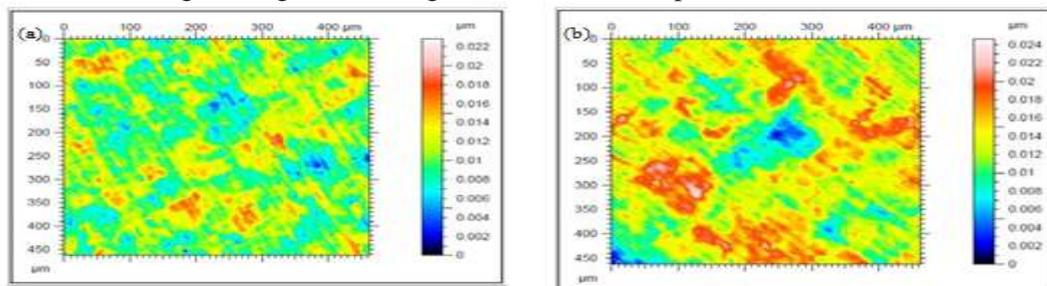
The surface roughness of workpiece (a) before nanoscale multi-tip tool cutting, and (b) after
